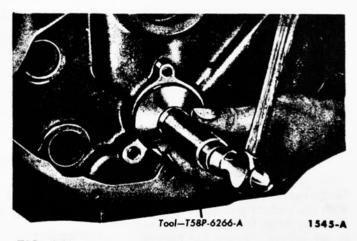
Camshaft Rear Bearing Bore Plug Installation
